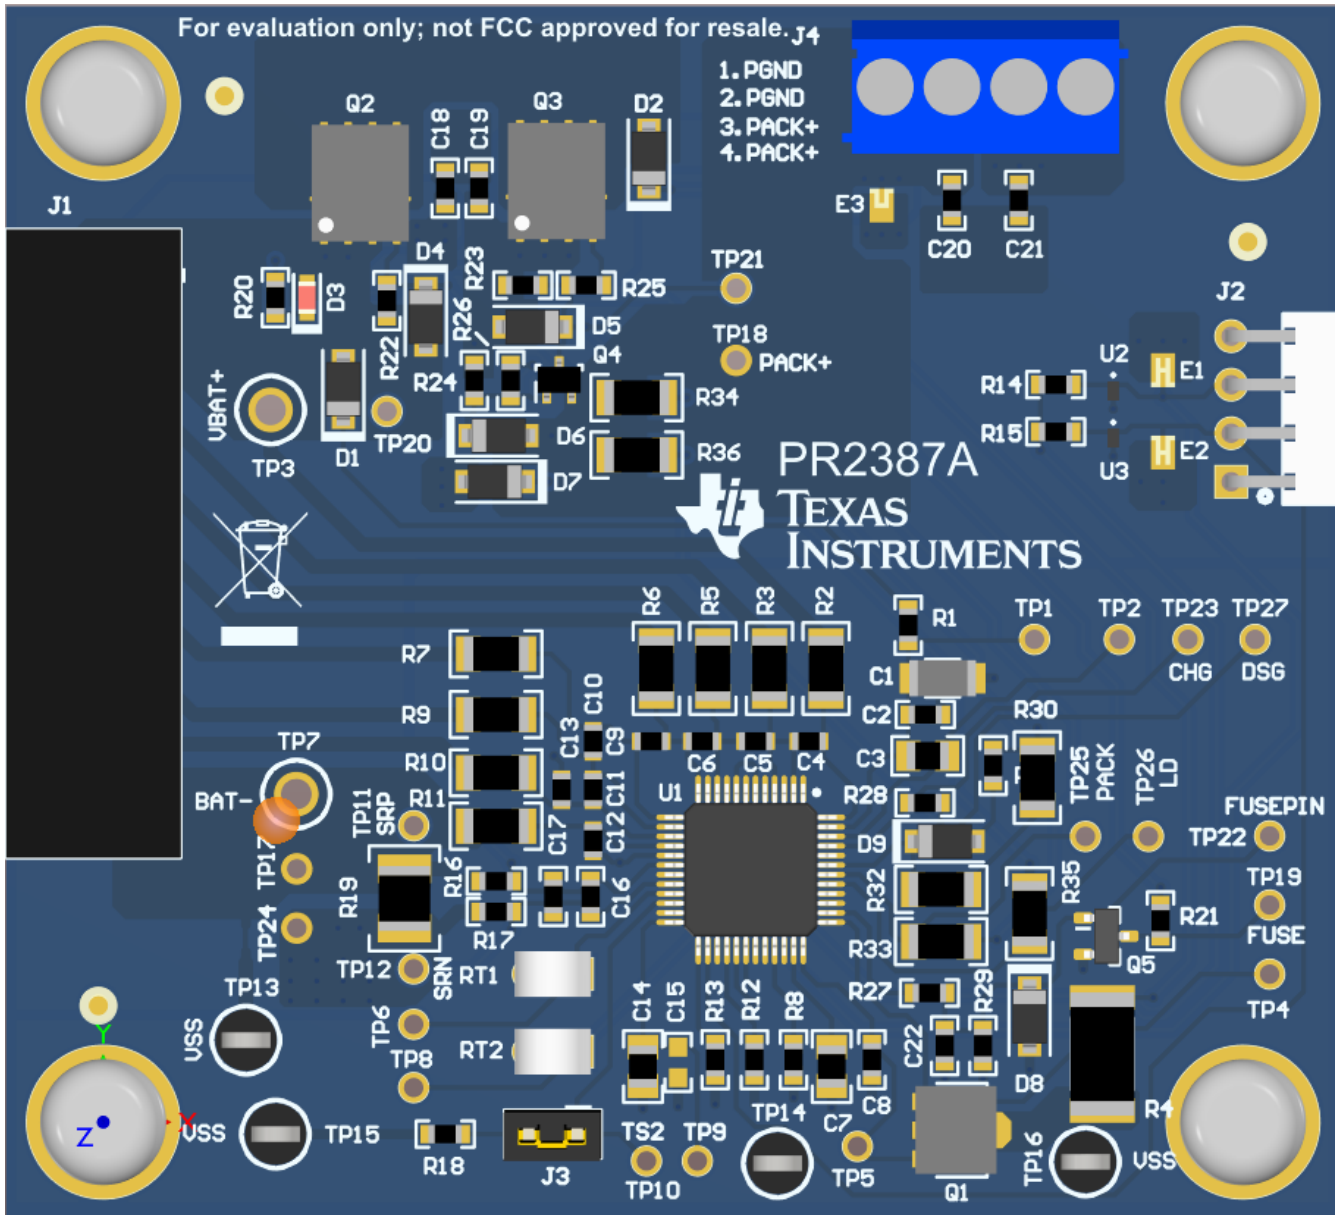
BQ76942 IEC ESD Test Board (Standard) Top View
